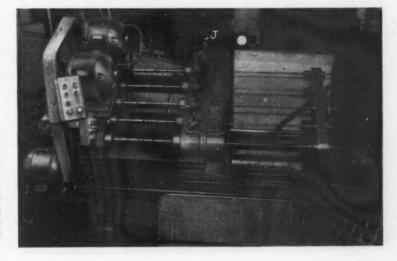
The 0·4813/ 0·4833-in. Diameter, 14in. Long Central Bore is Gun-drilled in Five Shafts at Once on this Krueger Barnes Machine, on which a Separate 3-h.p. Motor is Employed to Drive Each Spindle
